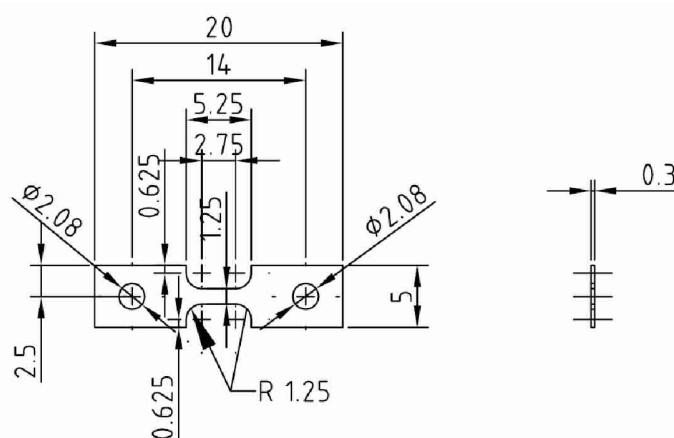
Sample geometry of the tensile specimen used with the miniaturized tensile machine at the Materials Science beamline. Units are given in mm.
